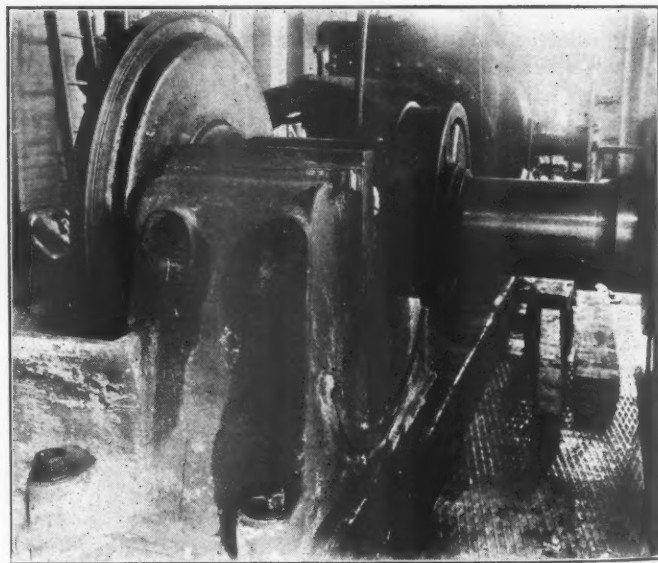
Welded 7-Ton Air Compressor Casting
